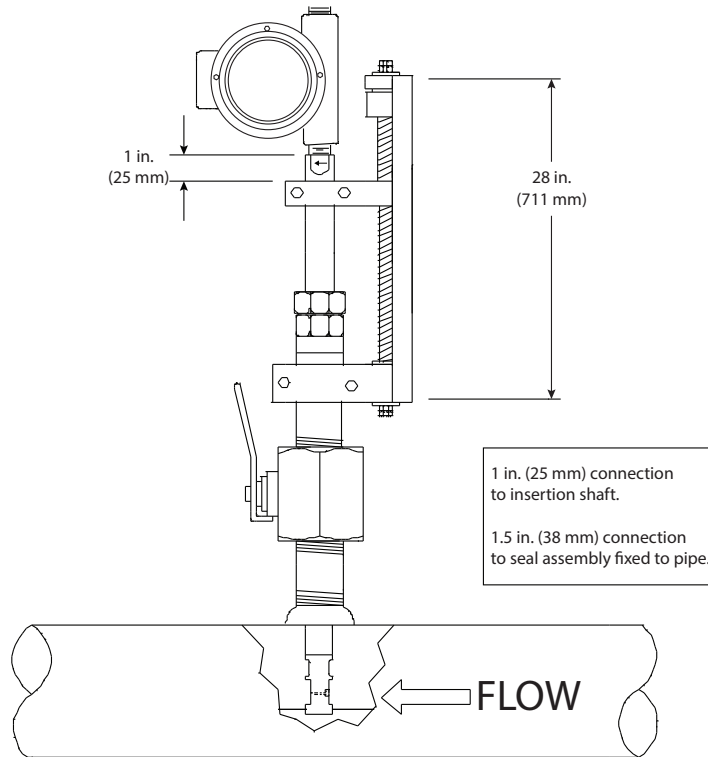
Insertion tool attached to VN2000 meter and seal assembly
